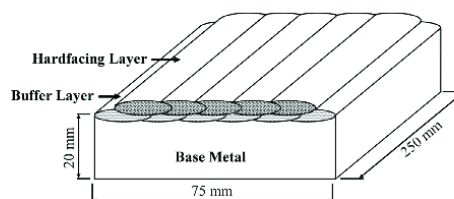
Schematic of the welding sequence, with one layer of buffer and hardfacing each.
